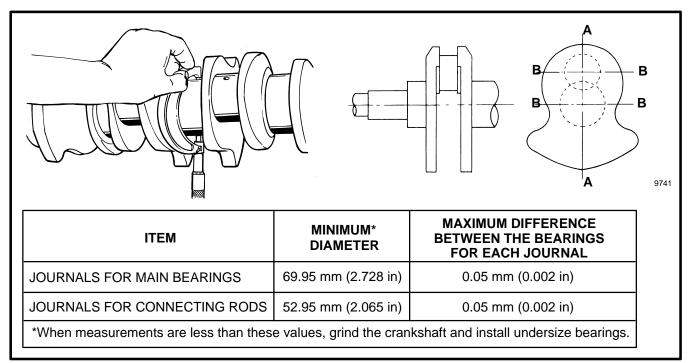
CRANKSHAFT SPECIFICATIONS
